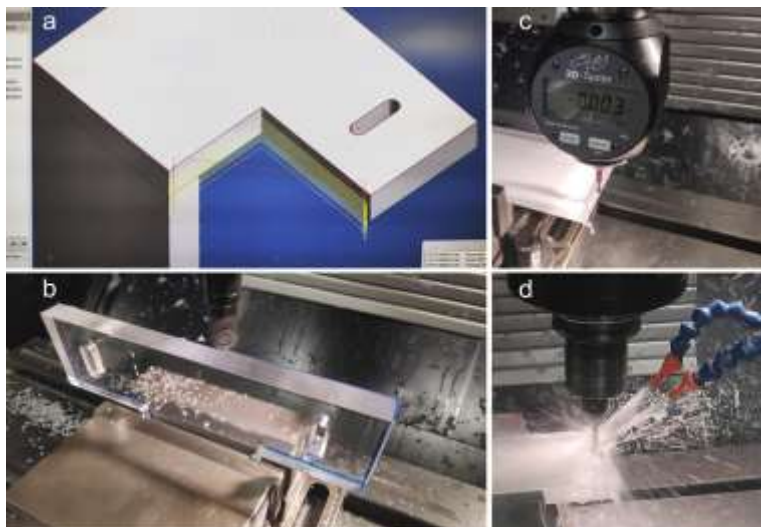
CNC machining operations: a) setting the cutting areas; b) determination of the x, y and z coordinate origin; c) chamfering of the edges; d) creation of holes and slots
